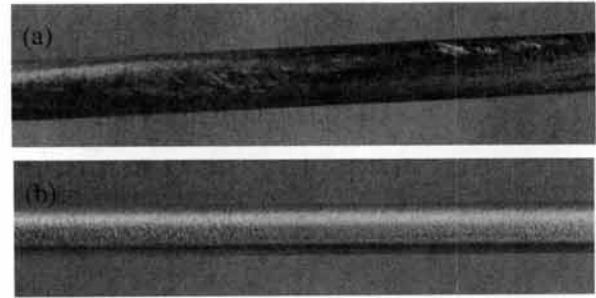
Surface AI wire. (a) aged AI wire, (b) after surface cleaning.
